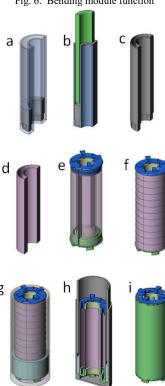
Fabrication of bending module. (a) Liquid silicone rubber poured into the outer mould. (b) Inner mould inserting. (c) Moulds removed. (d) Extra part cut. (e) Assembly of the bending module. (f) Copper wire attached and leaded out. (g) Liquid silicone rubber poured into the finishing mould. (h) Inner finishing mould inserting. (i) remove the moulds
